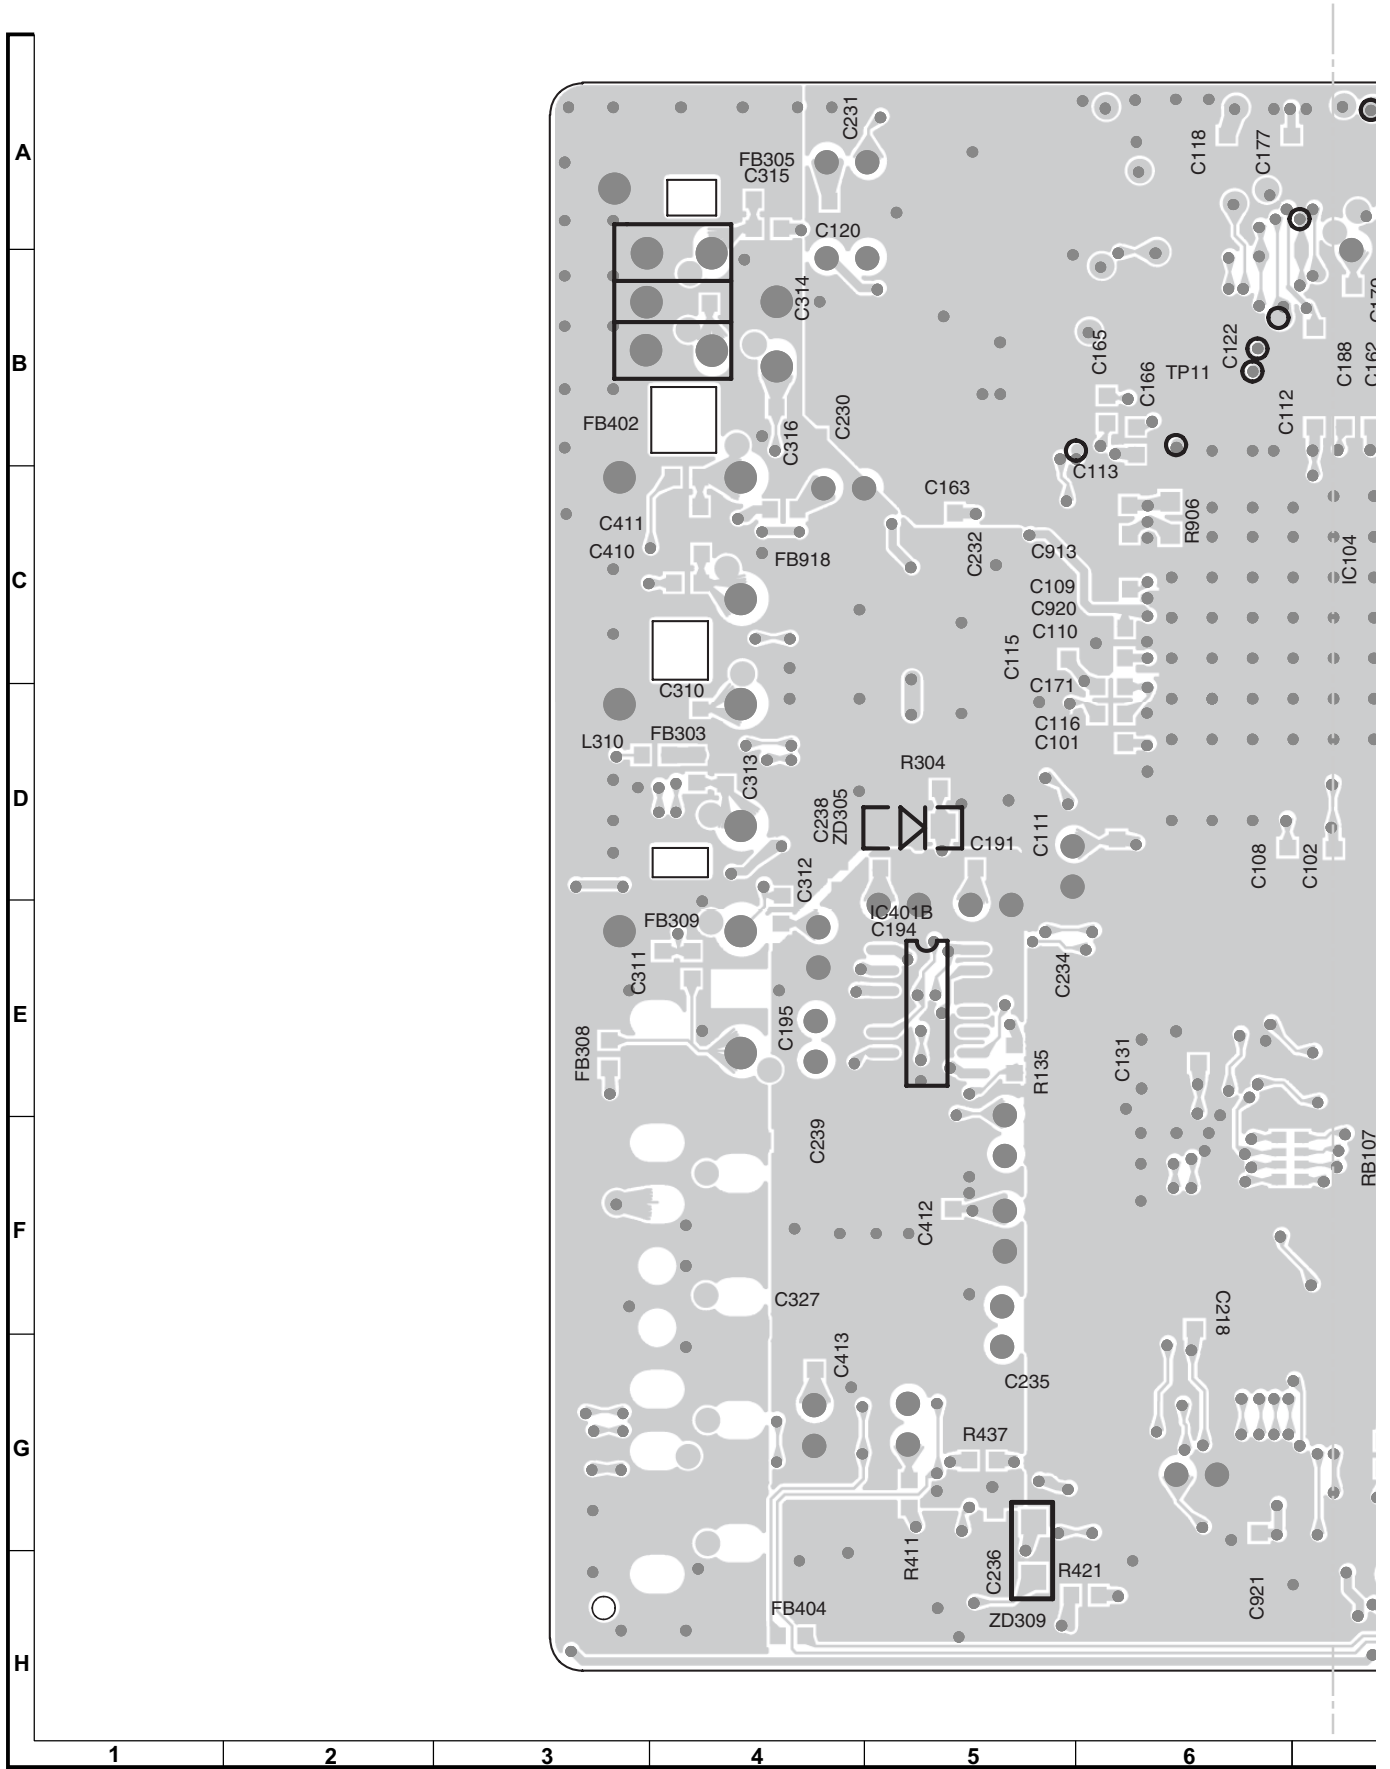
WIRING SIDE OF MAIN PCB (BOTTOM VIEW) 1/2
